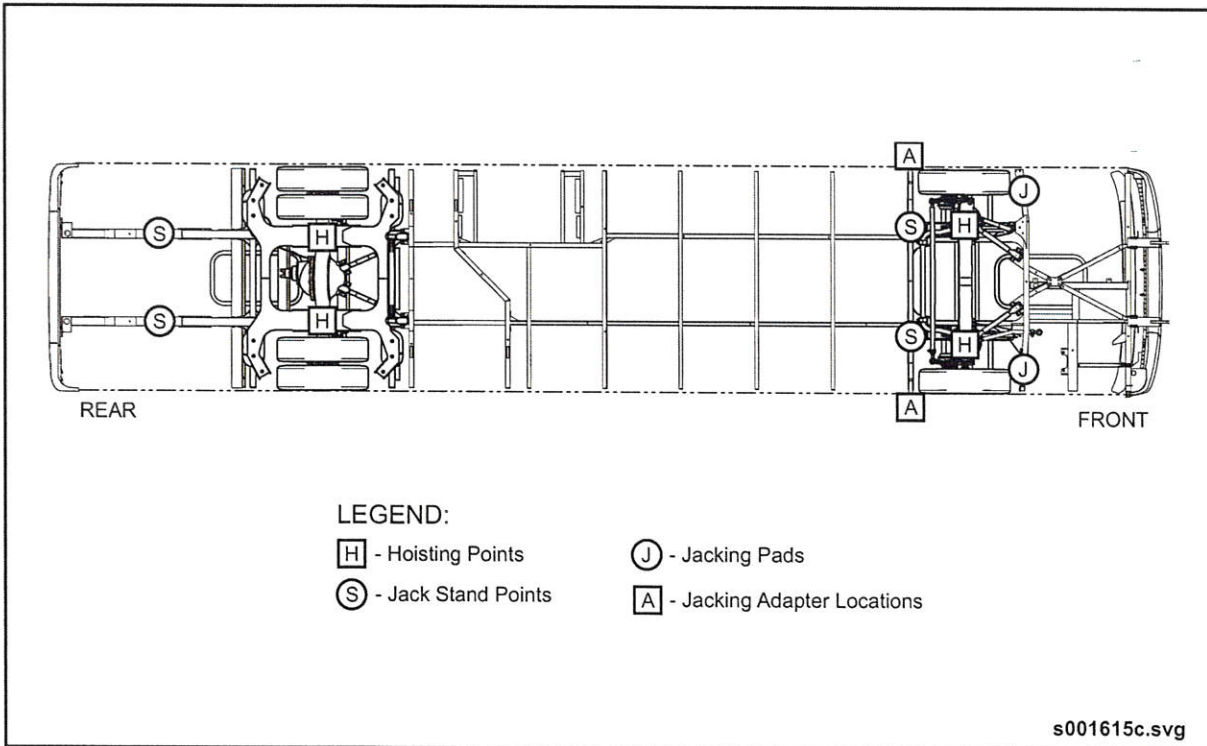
Jacking (hoisting) Points & Stand Placement
